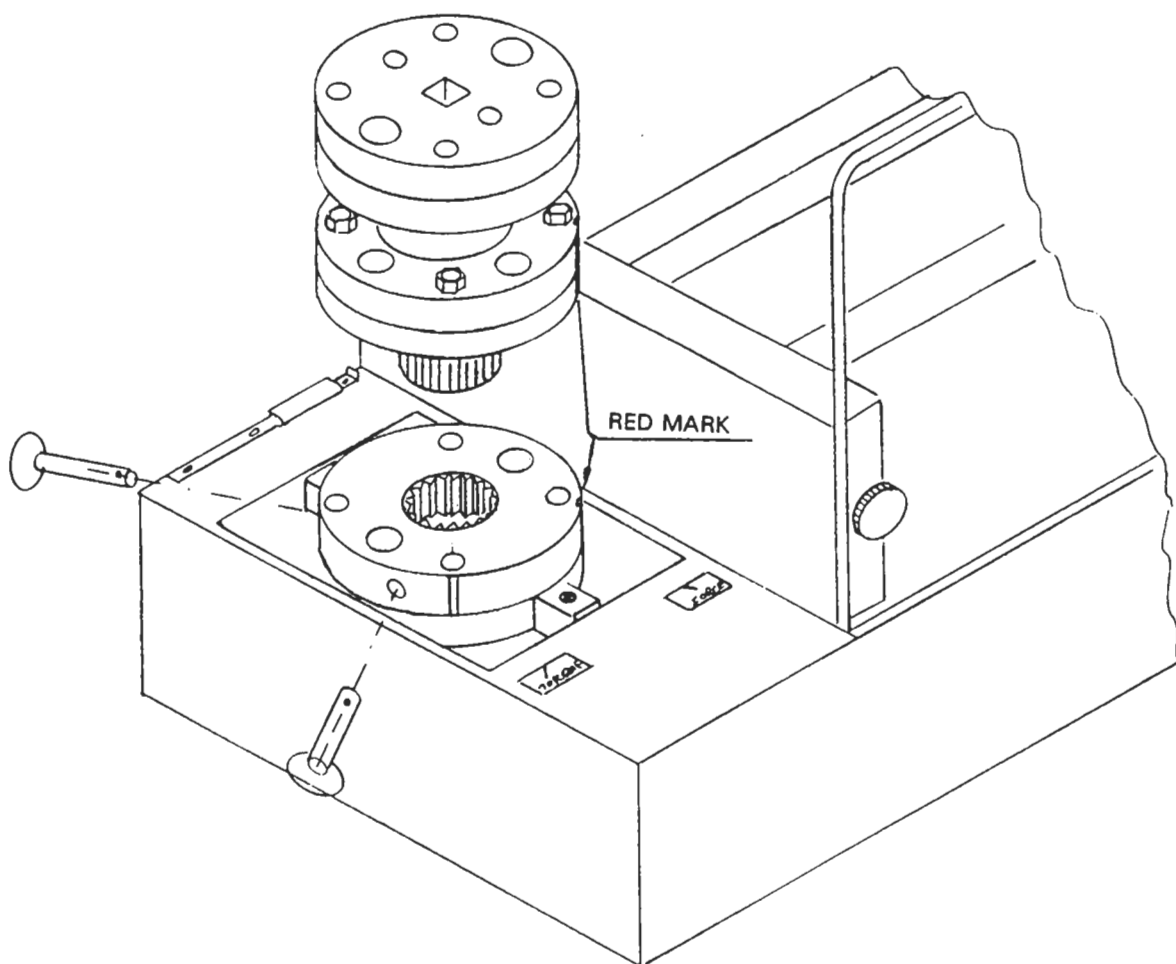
Torque Multiplier Test Setup (Sheet 3)
